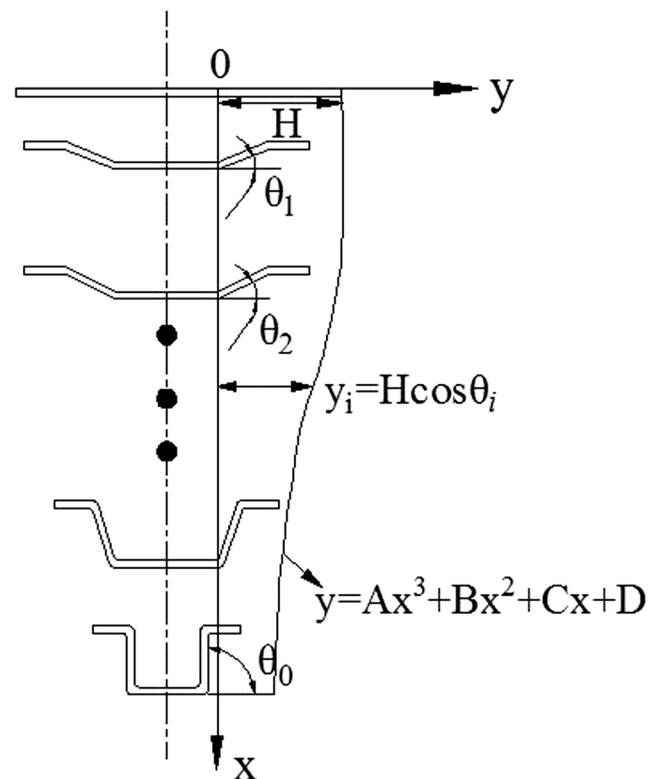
Projection track of the edge of a hat-shaped steel section in the horizontal plane
